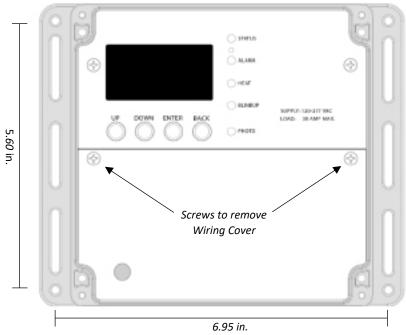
Top View of the Frio S1 controller showing mounting hole dimensions.
